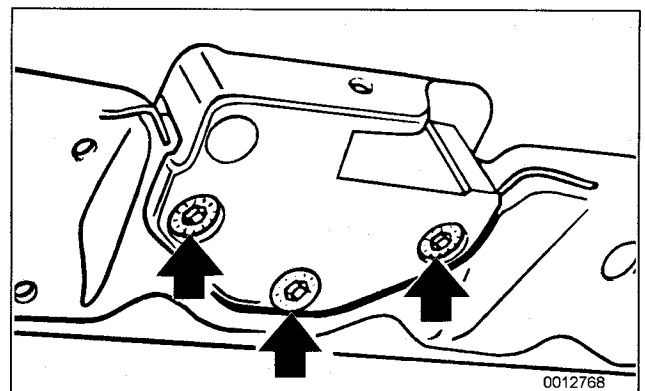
Visor latch plate is held to top of windshield with three bolts (arrows).
